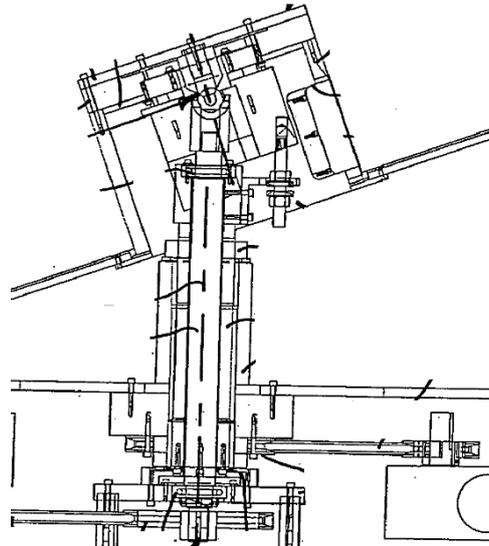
Rotary Feeder with Incline Disc by universal joint[9]
